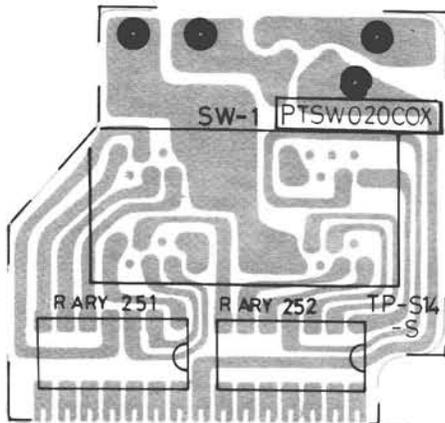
Channel Selector Printed Circuit Board – 14T303
